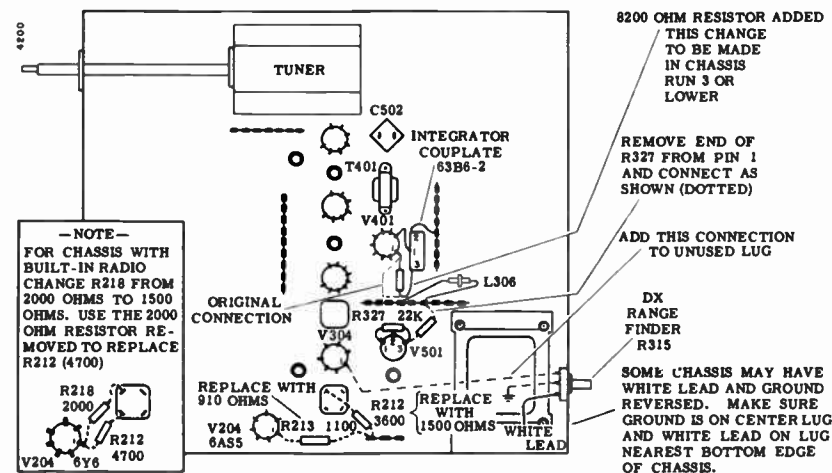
Bottom View of Chassis Showing Simplified Circuit Changes for Reducing Bending and Improving Horizontal Sync in Chassis Stamped Run 2 or Lower.
